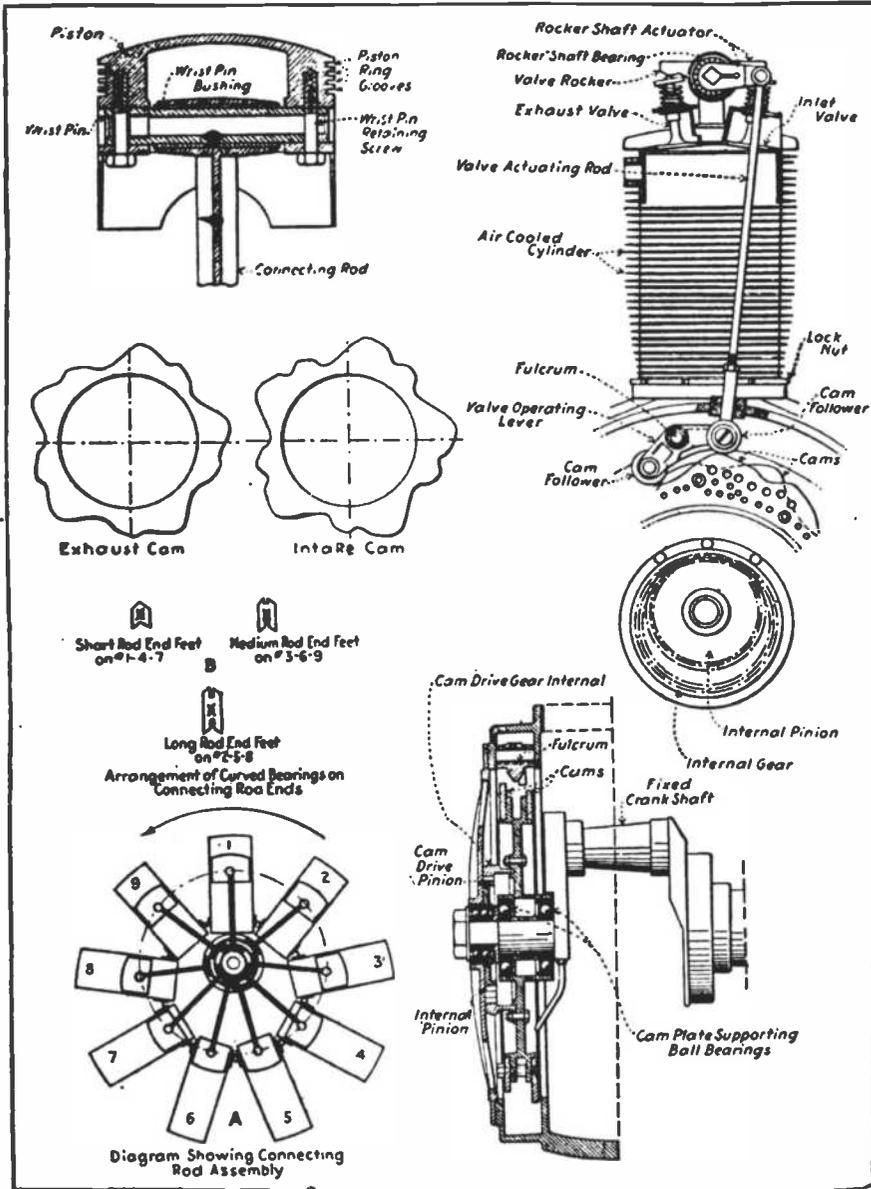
Interesting mechanical details of the Le Rhone rotary cylinder motor
